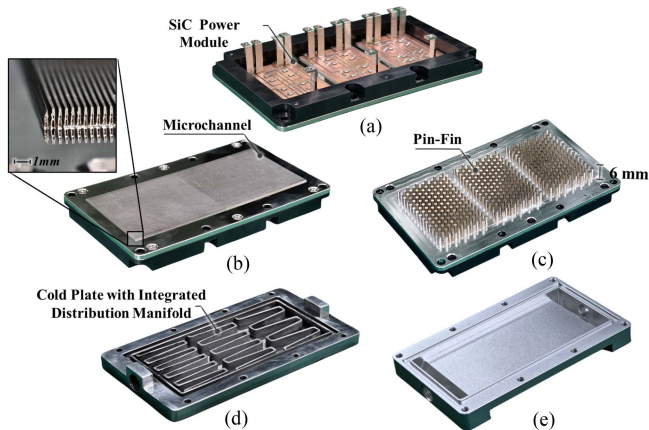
Power module with different heat sink. (a) SiC power module. (b) Optimized MMC heat sink. (c) Traditional pin-fin heat sink. (d) Cold plate for the MMC heat sink. (e) Cold plate for the traditional pin-fin heat sink.
